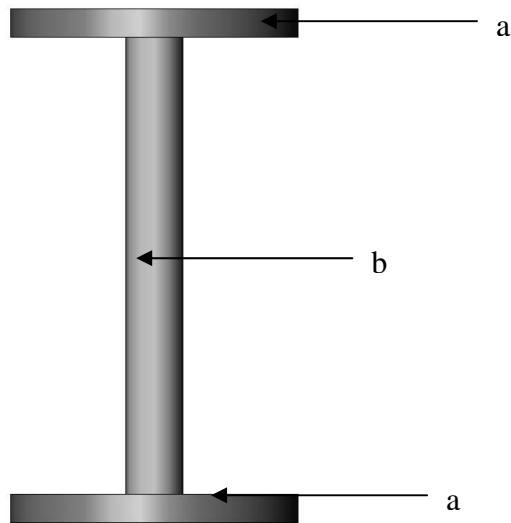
Attachment of plastic end plates to steel core. The ends of the steel and a hole in the end plates were threaded to facilitate assembly.
